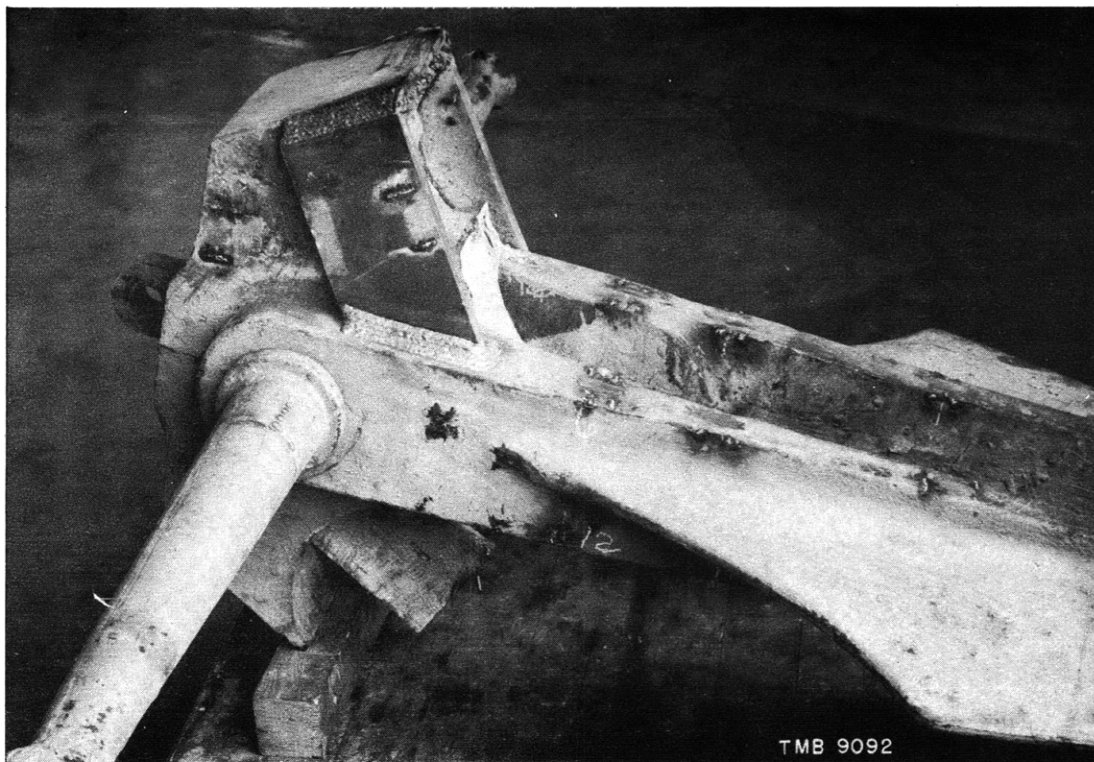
View of Flukes, Crown, Stock, and Fractured Shank after Testing
